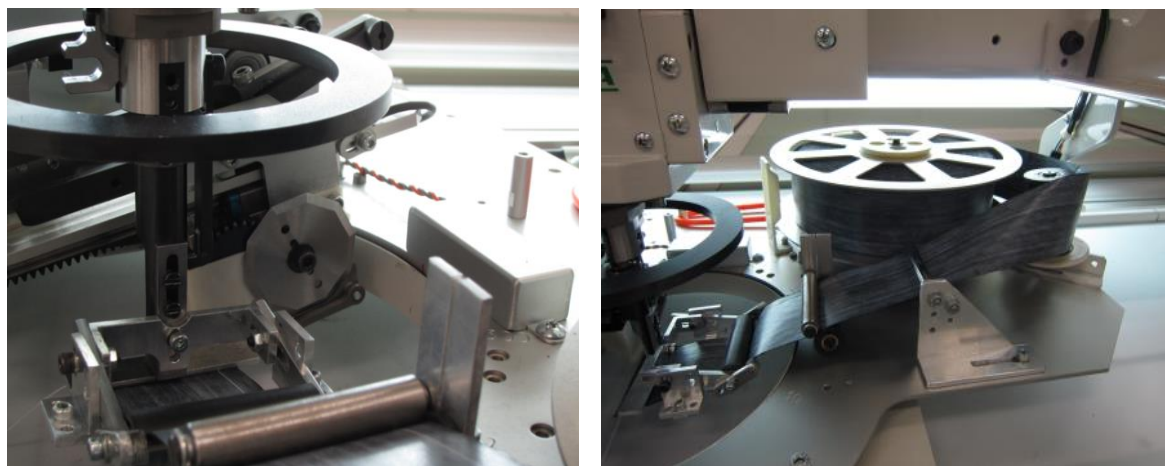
Advanced automated tape placement machine using machine stitching.
